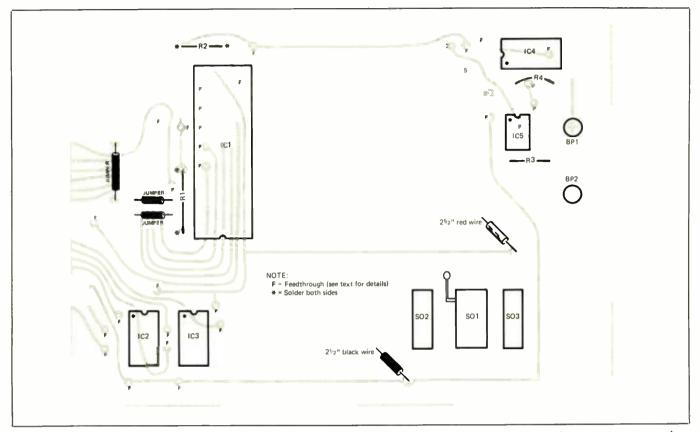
This drawing shows installation information for the pc board. Note that certain wires and components must be soldered to the pads on both sides of the board.
